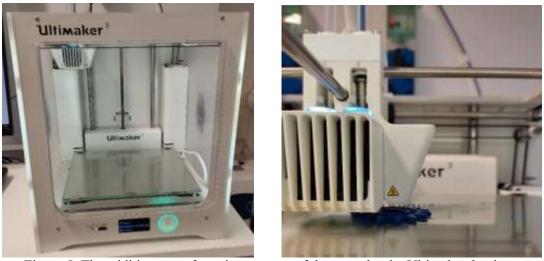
The additive manufacturing process of the gears by the Ultimaker 3 printer
